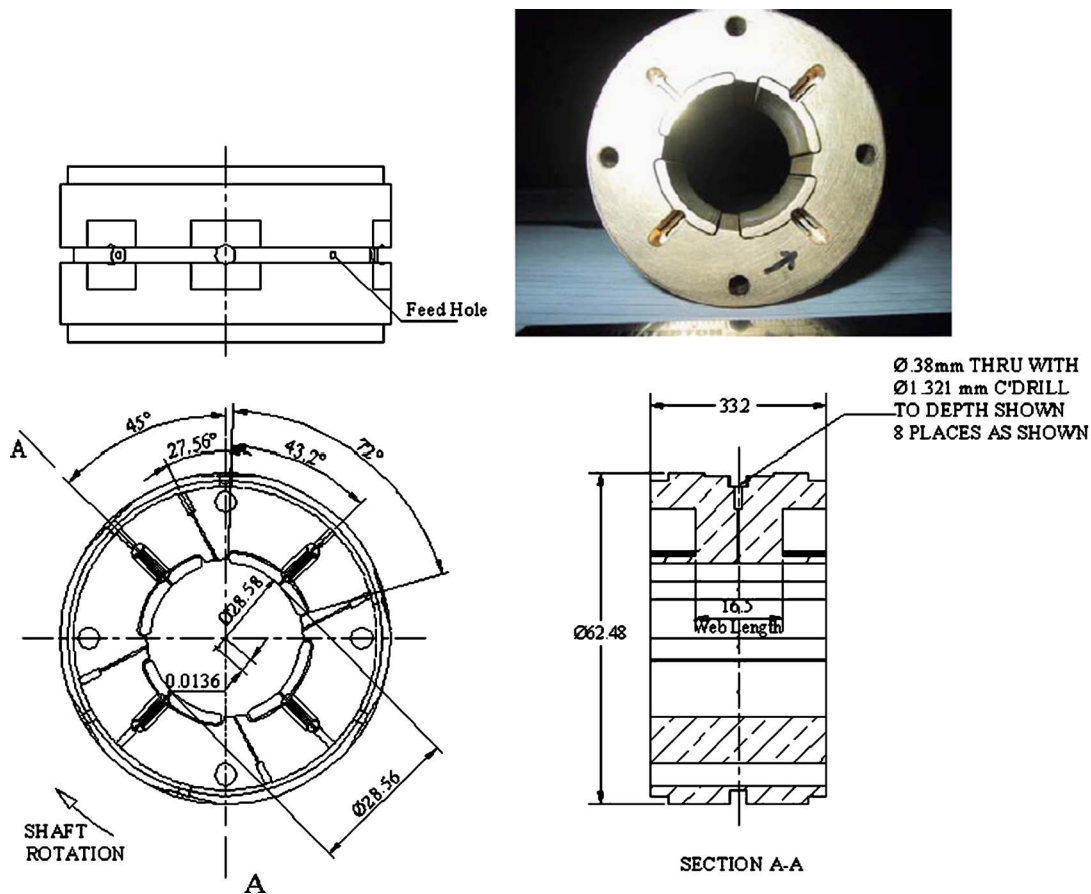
Flexure pivot hydrostatic pad gas bearing. Photograph of bearing and details of bearing geometry.
